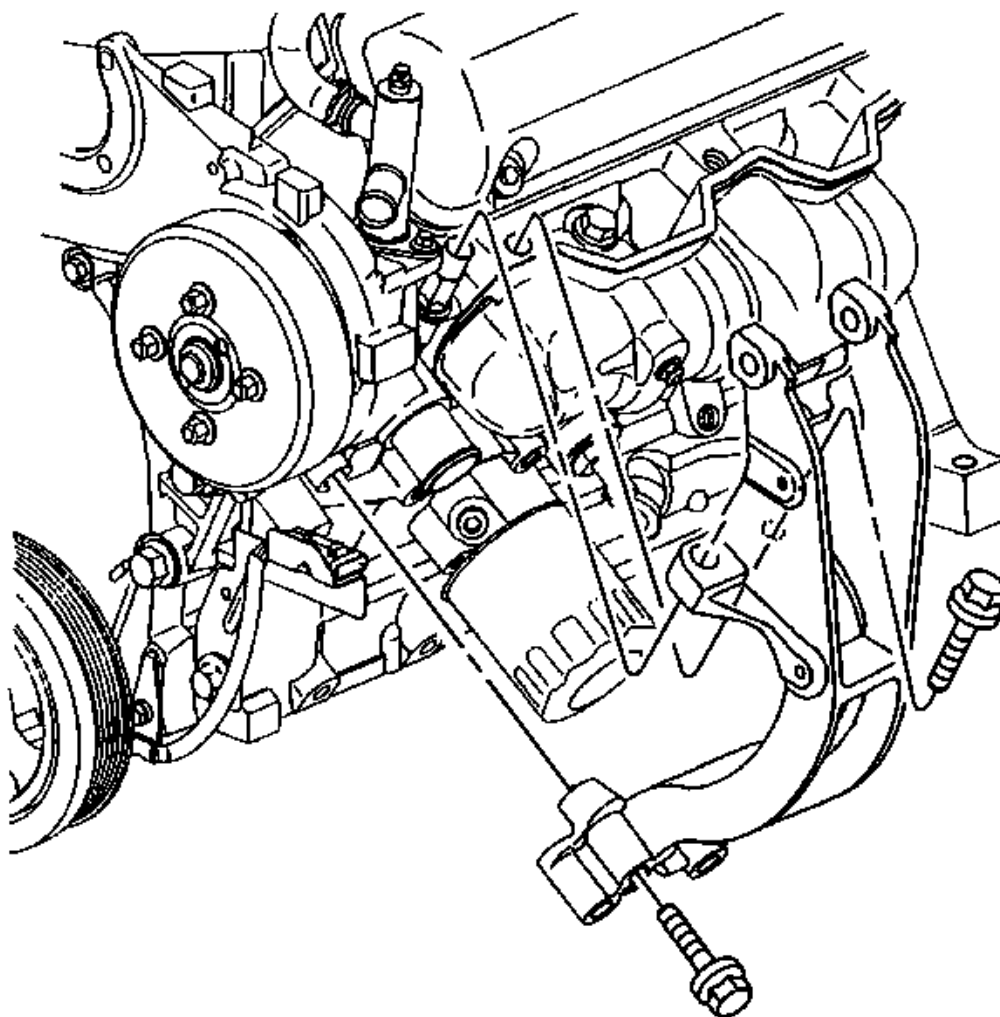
View Of Lower Engine Mount Strut Bracket Bolt
